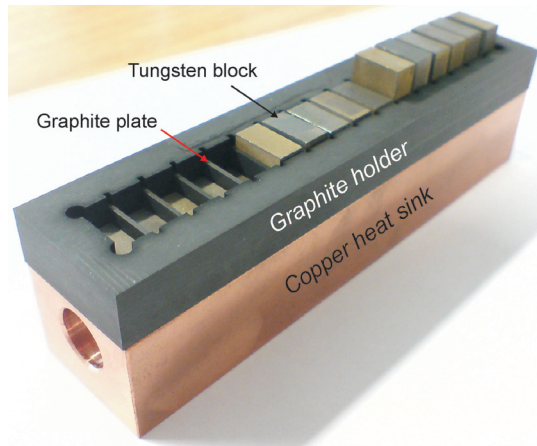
Graphite holder positioned on the copper heat sink before the brazing process (component #1). Vertical slots were machined in the inner surfaces of the holder to insert thin graphite plates, which enabled to keep the samples upright and distant from each others during the brazing process.
